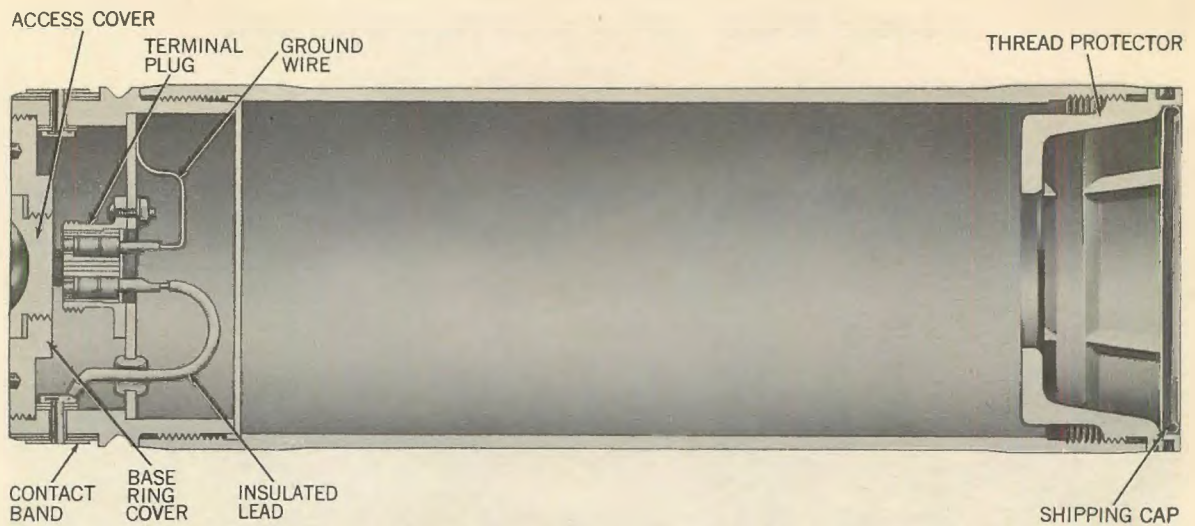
5.0-Inch Rocket Motor Mk 9 Mod 0, Cross Section.
